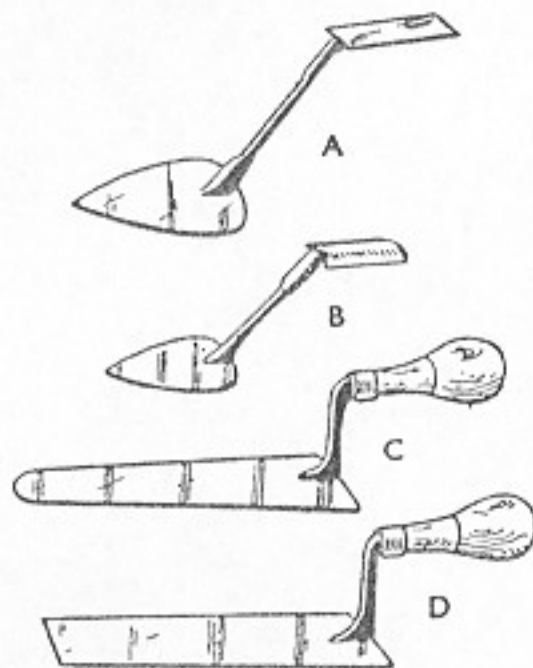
Trowels used in making molds. A, heart-shaped trowel; B, gate knife used for cutting gates and runners; C and D, two types of trowel used for purposes of jointing.
